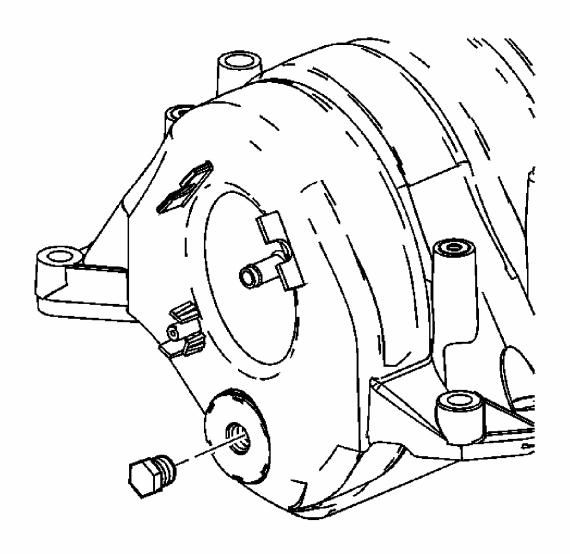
Identifying Intake Manifold Plug Courtesy of GENERAL MOTORS CORP.
